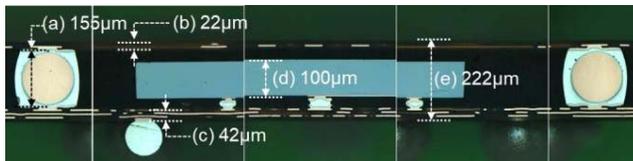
Cross-sectional image: a) CCSB b) Top RDL Interposer c) Bottom RDL Interposer d) Silicon Die and e) Pkg. thickness except BGA
